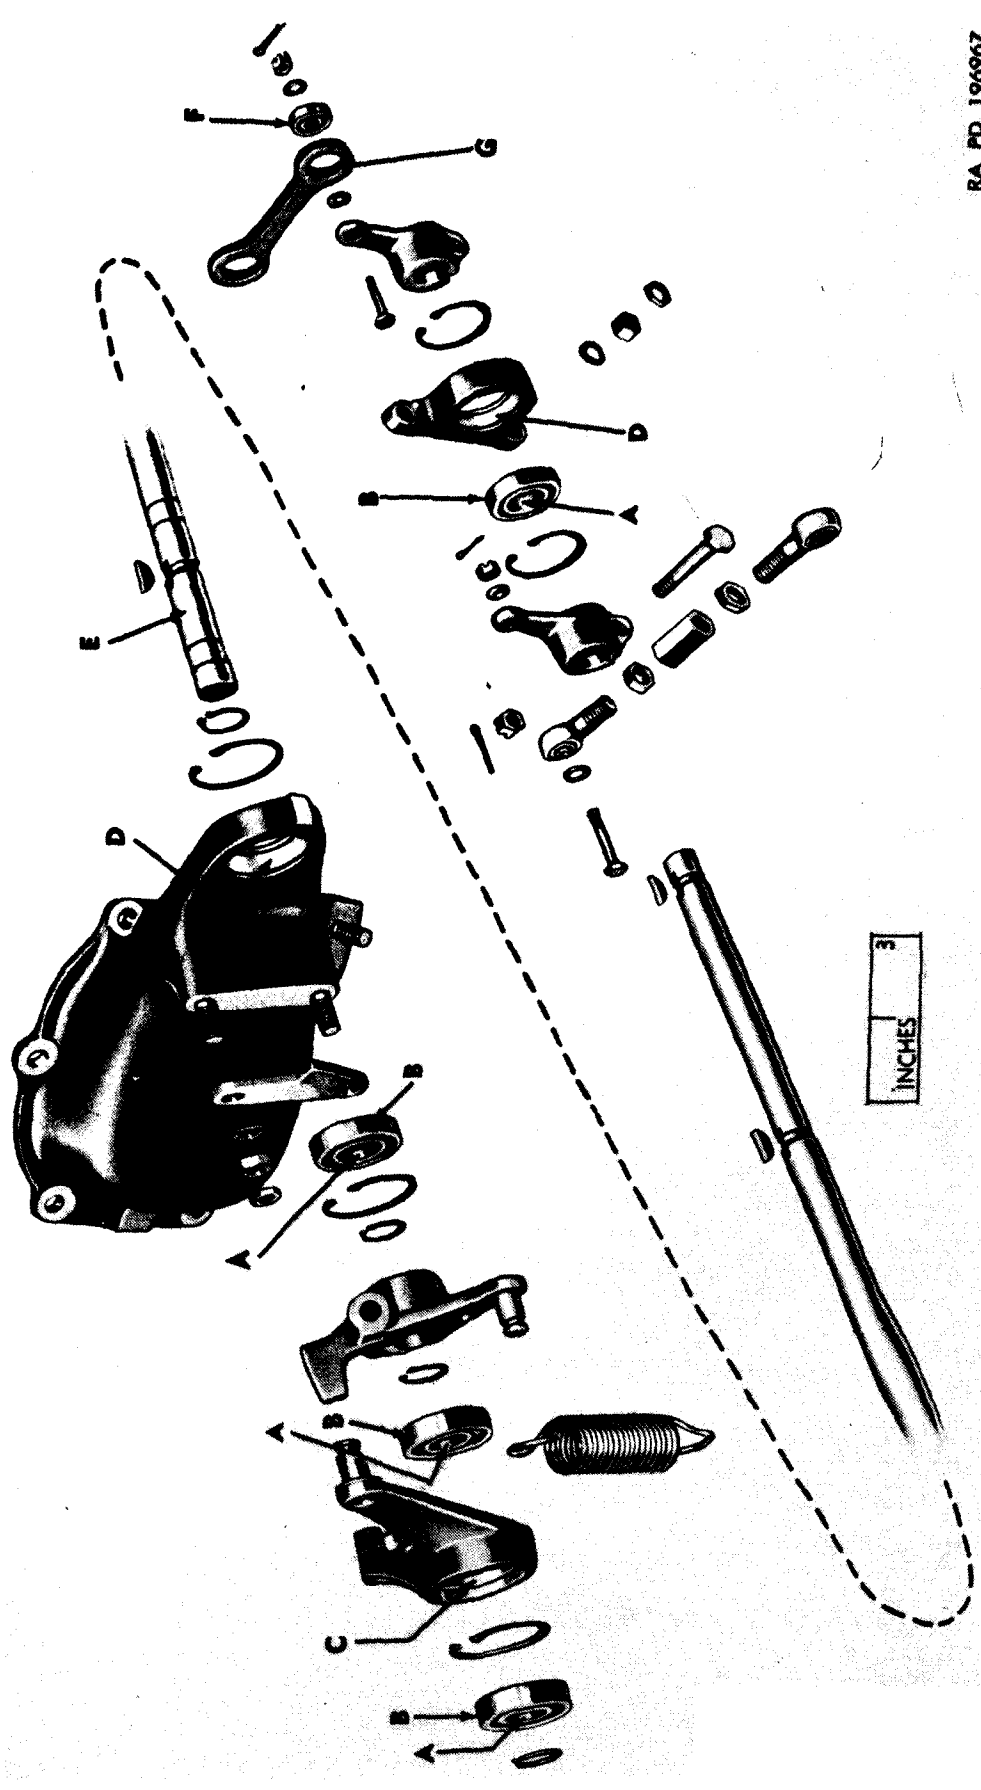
Repair and rebuild standard points of measurement for throttle linkage cross shaft assembly.
